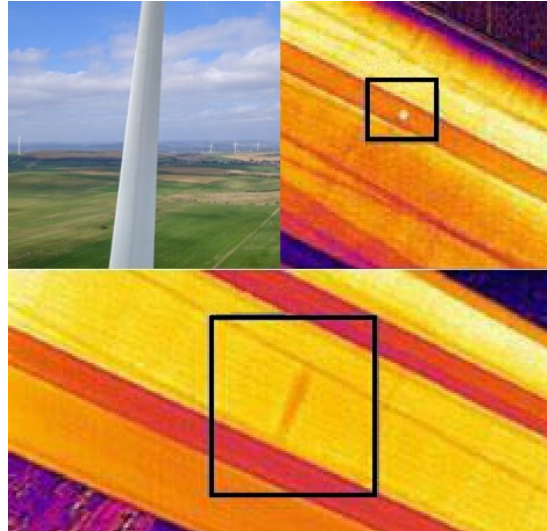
Thermal imaging technique for blade damage detection [139]
